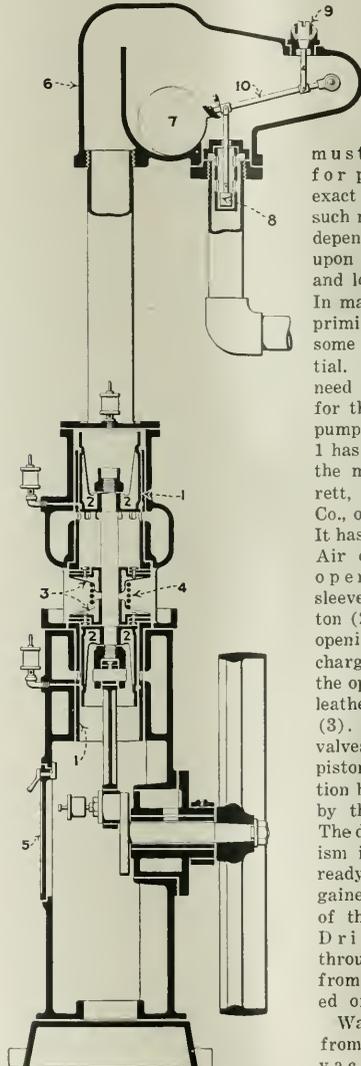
CROSS-SECTION OF PUMP PRIMER
